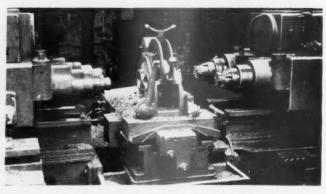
A Barnesdrill stub borer for machining four bearing housings
